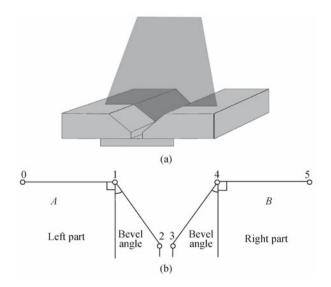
Weld groove and its laser strip profile feature. (a) Schematic of V-groove with back plate; (b) Profile and break points
